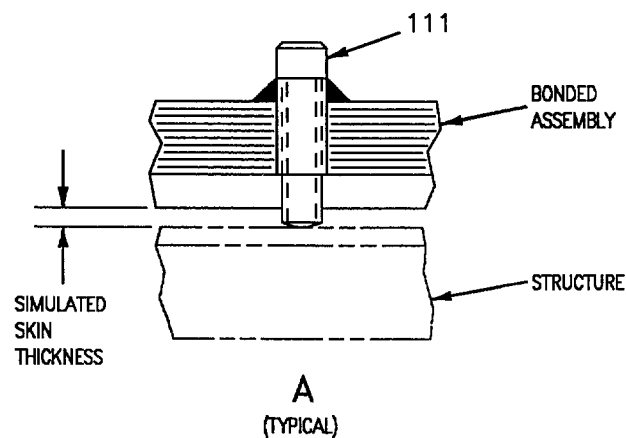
Installation of Plate Set for Drilling 74A180756 Skins (Sheet 3)
